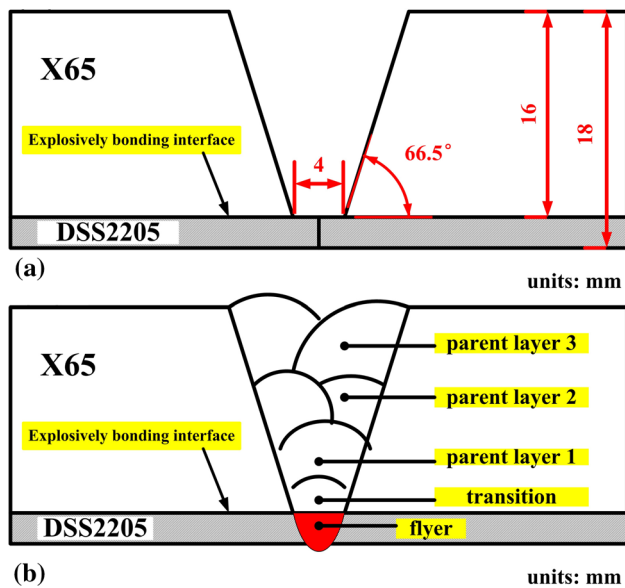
Schematic illustration of the groove dimensions and welding procedure
